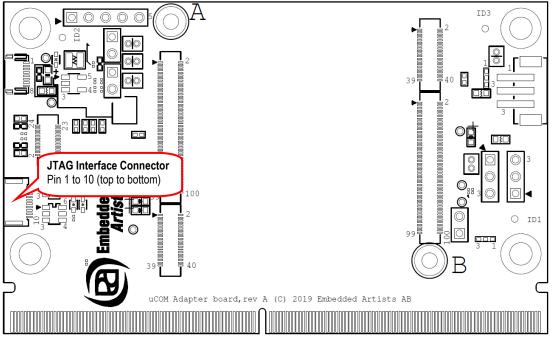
uCOM Adapter Board, Location of JTAG Interface Connector
